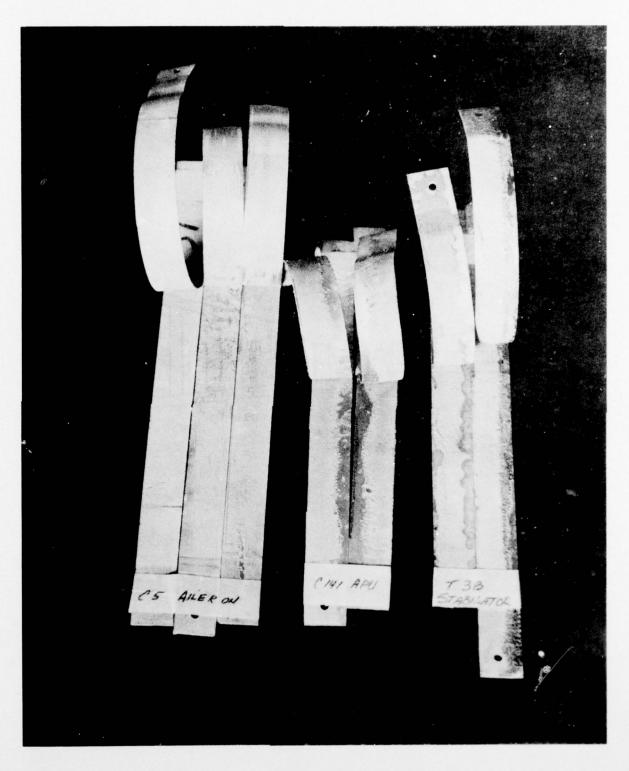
Salt Spray Exposed Peel Specimens After Test
